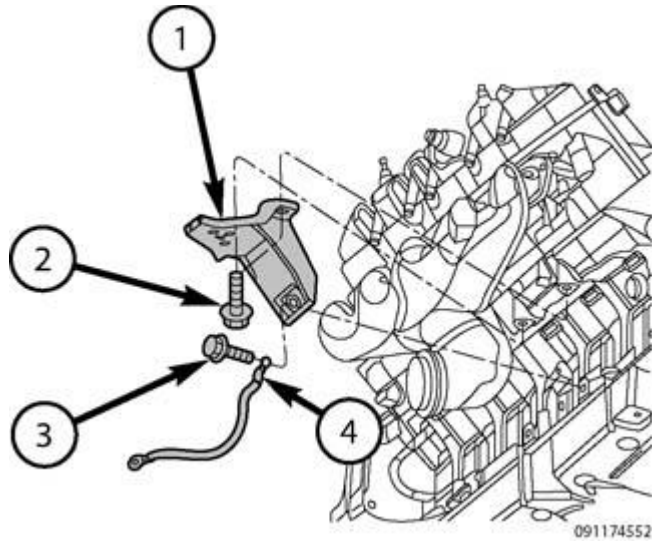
Ground Strap, Engine Mount Bracket & Bolts
